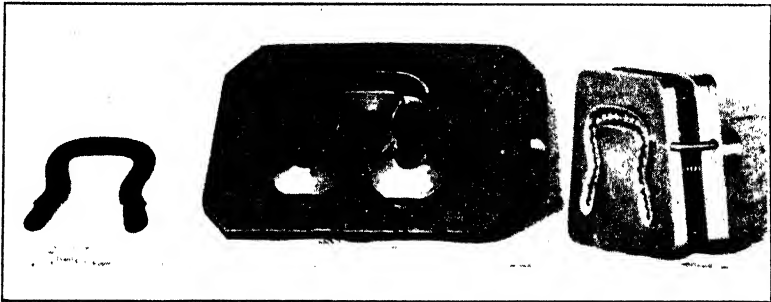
Simple blanking die with spring stripper, no guide pins.
